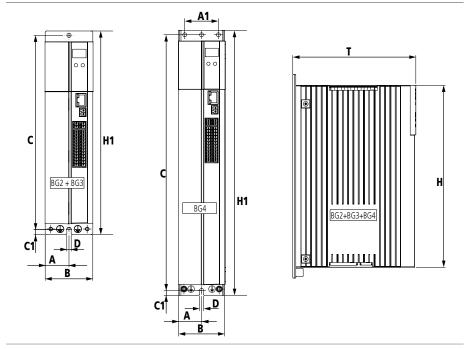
Dimensional drawing BG2, BG3, BG4
